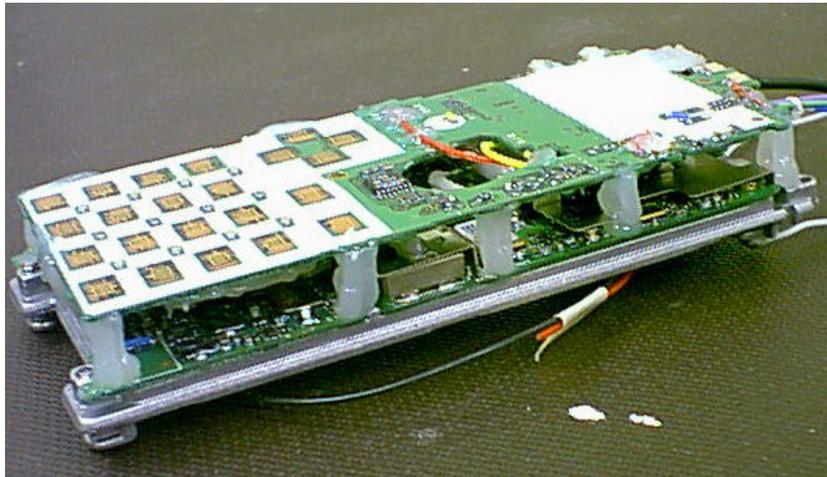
Modified TH-D7 circuit boards that are conformal coated and use staking compound to separate the boards.
